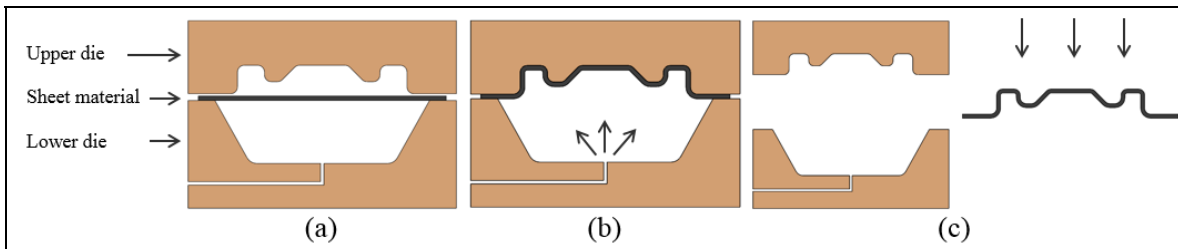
The schematic of the SPF technique a) Heating of the sheet material, b) Gas blow forming, c) Cooling
